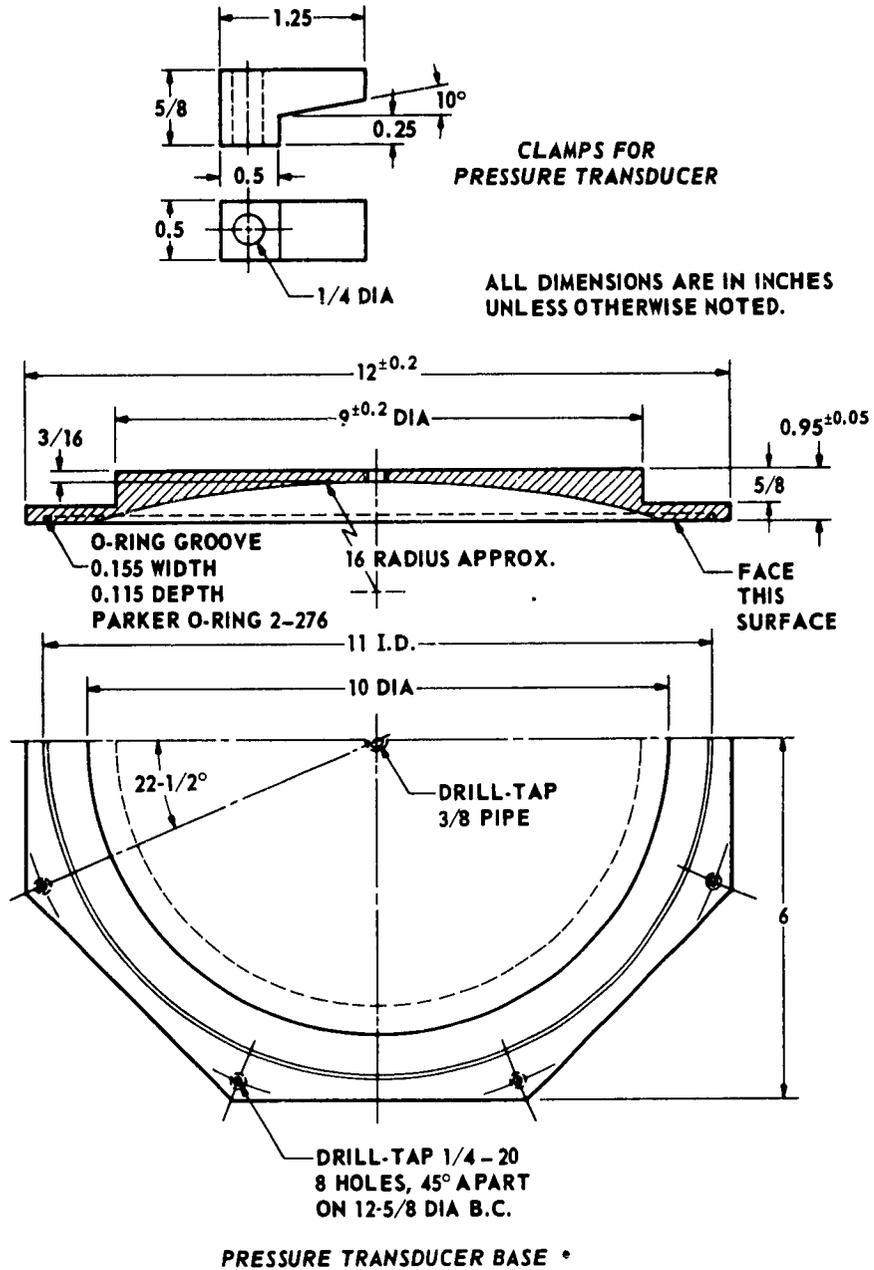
DRAWING OF TRANSDUCER BASE PLATE
